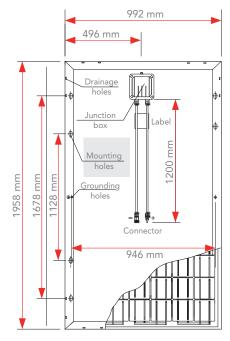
EXAMPLE OF MOUNTING HOLES, AS-P7 SERIES
